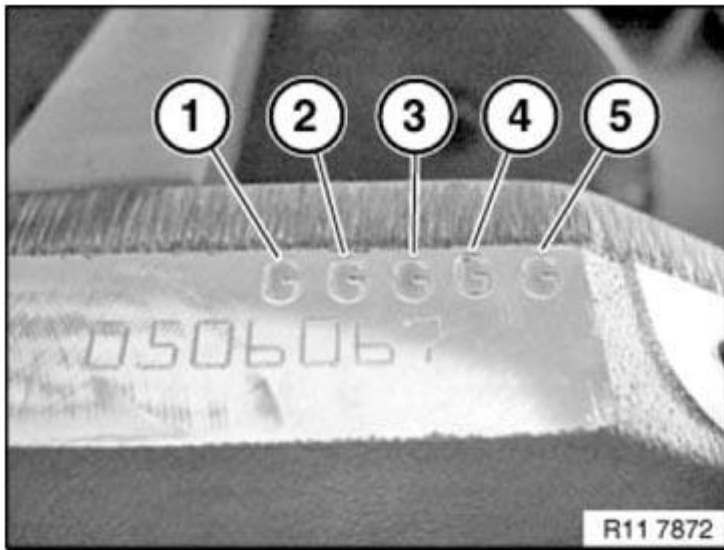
Identifying Color Assignment In Crankcase 1 To 5
